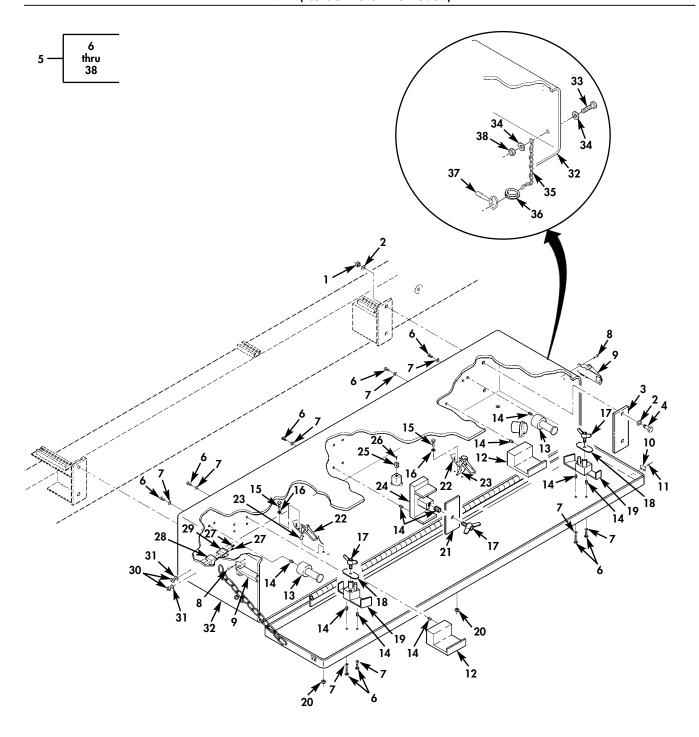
Toolboxes and Related Parts (Sheet 1 of 2).
